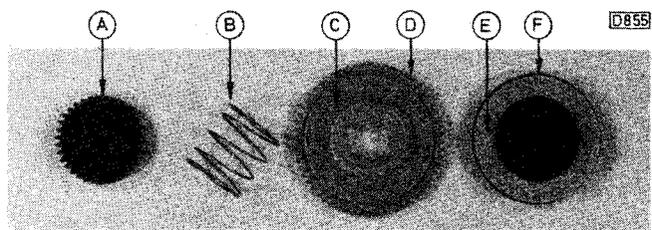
Dismantled clutch assembly. Key: A upper gear; B tension spring; C clutch plate; D central gear; E friction pad; F lower gear.
